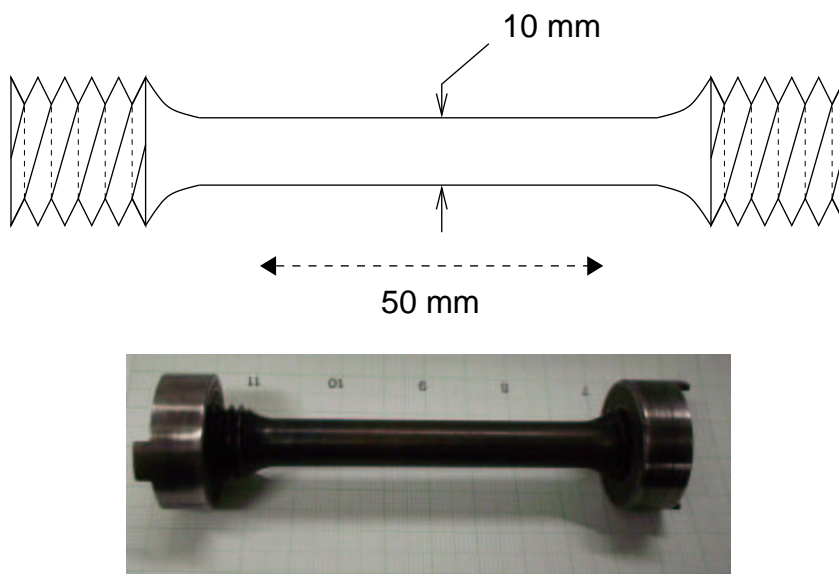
Tensile testing specimen made from all-weld metal
